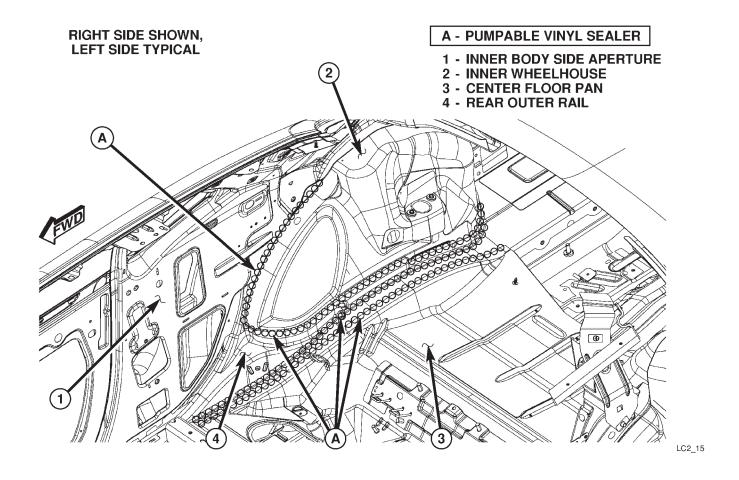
REAR WHEELHOUSE (FRONT)/RAIL INNER/CENTER FLOOR PAN
